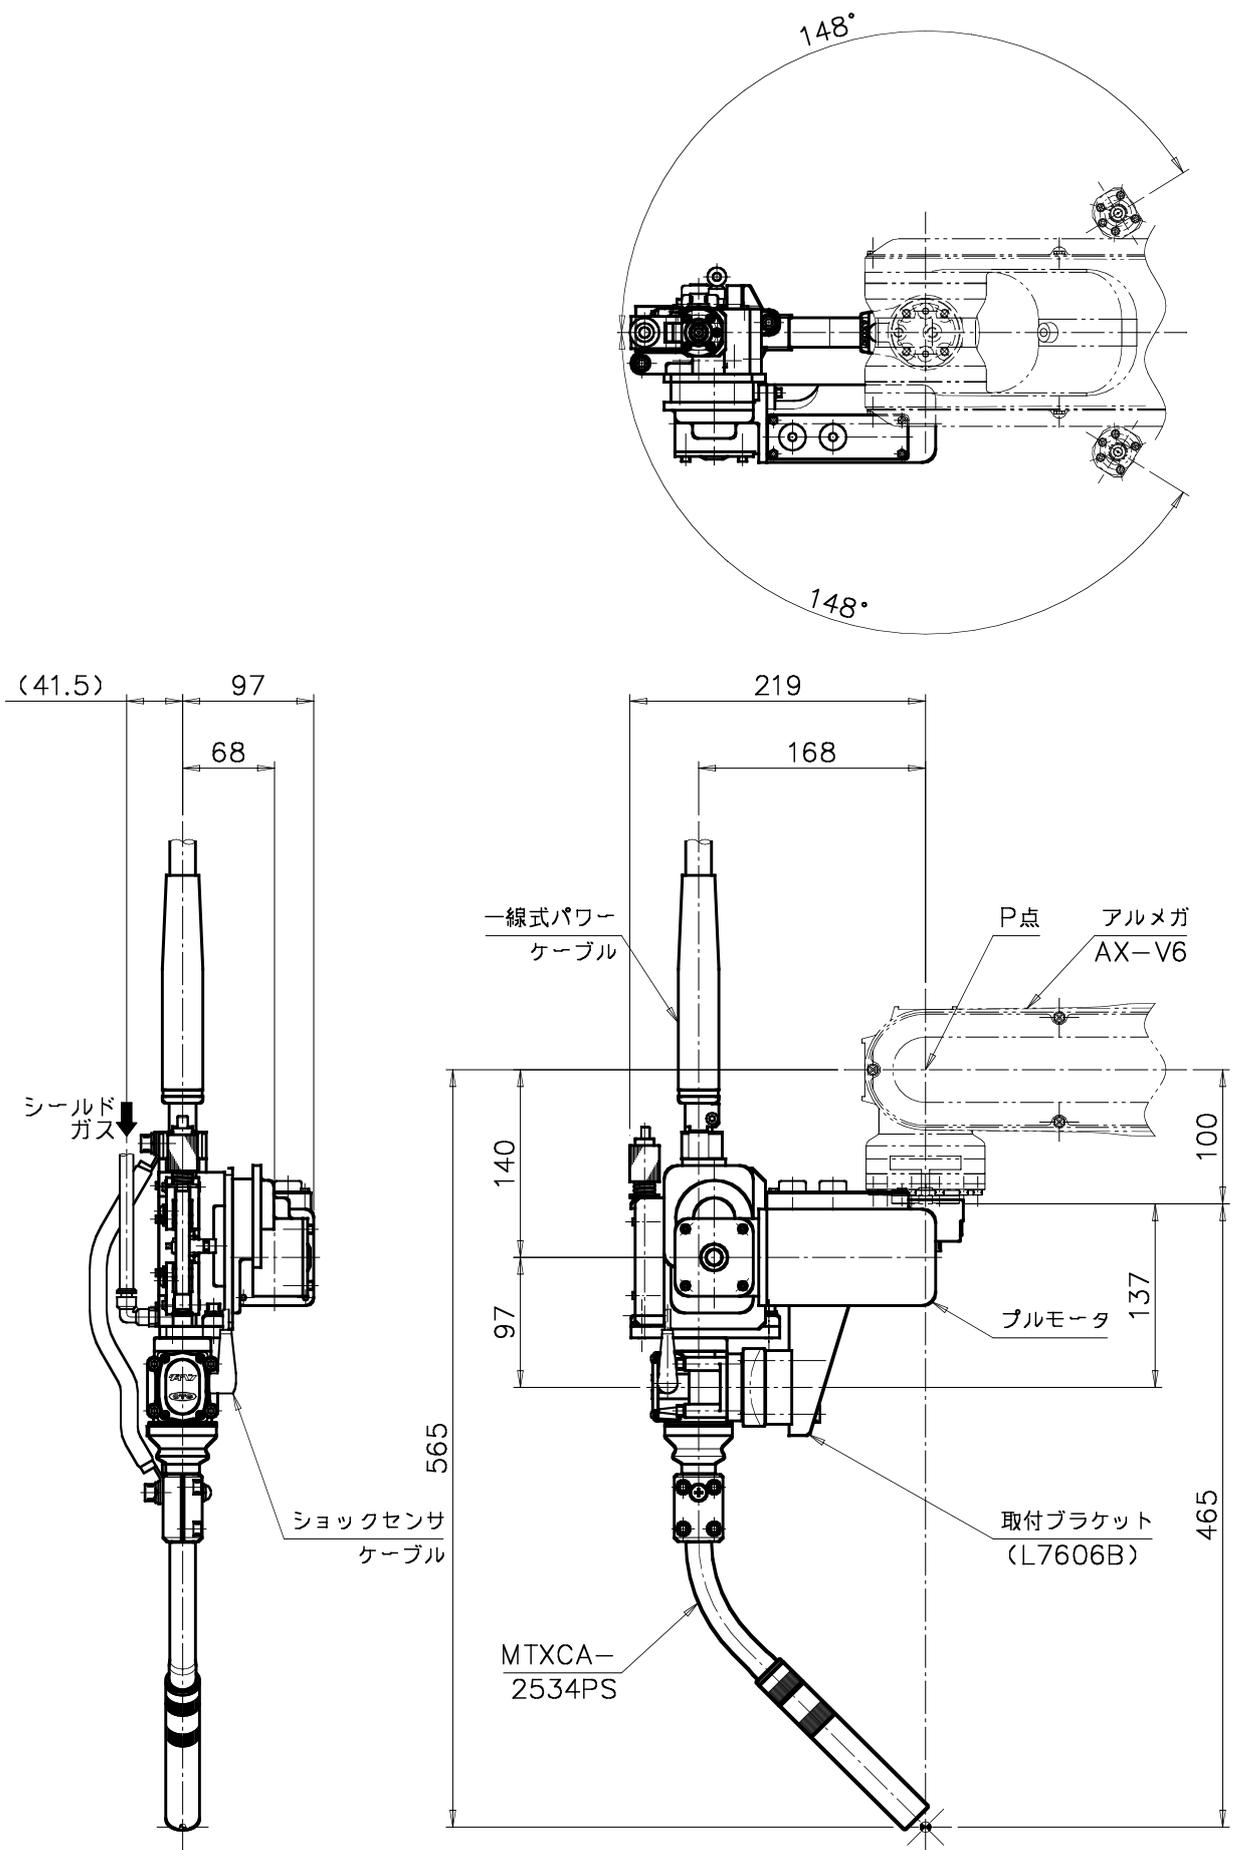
Assembly drawing of pull feeding unit L-7591 + MTXC-2534PS
